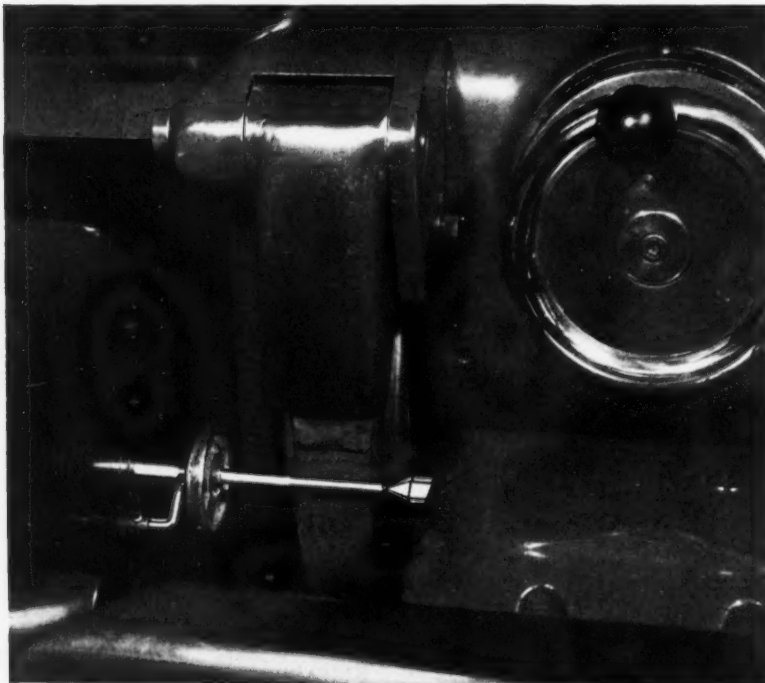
Finish-grinding a Special Micrometer Barrel on a Plain Hydraulic Grinding Machine within a Tolerance of 0.0002 Inch
